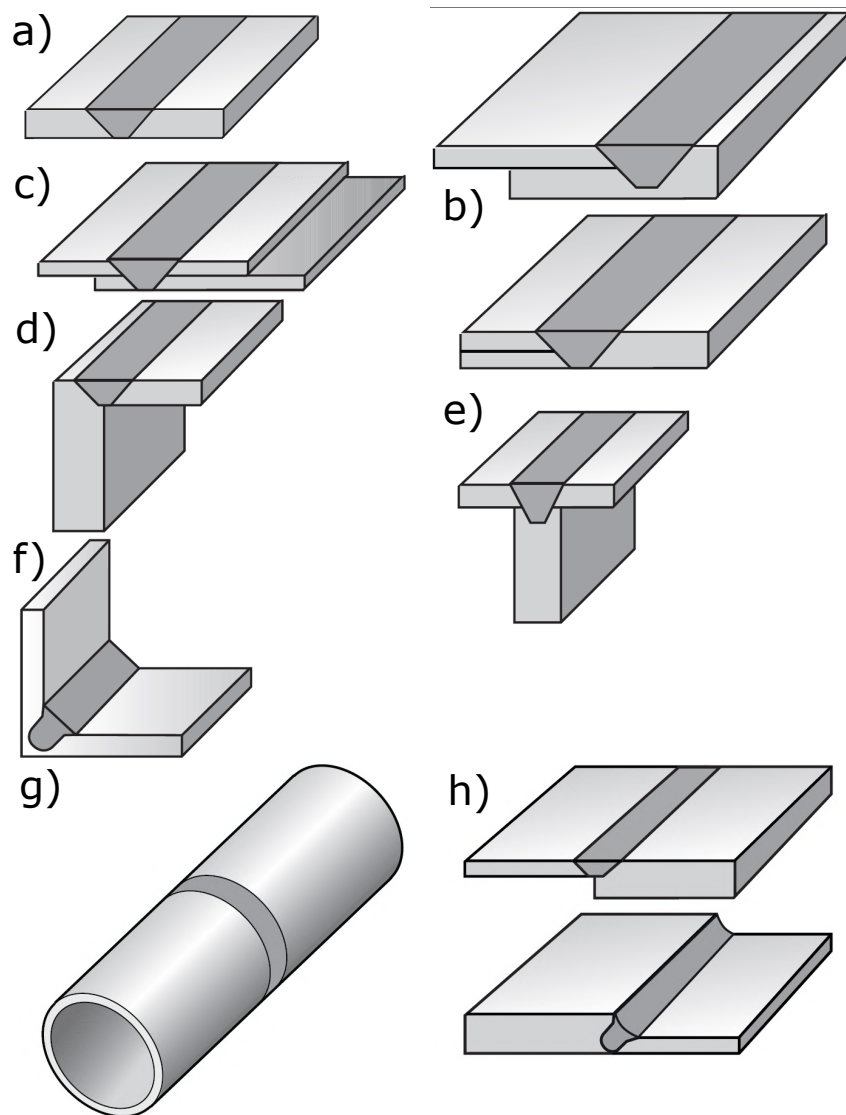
Welded FSW configurations: (a) Butt joint (b) Half overlap joint (c) Lap joint (d) Corner joint (e) T-joint (f) Fillet joint (g) Circumferential butt joint (h) Different thicknesses butt joint [26].
